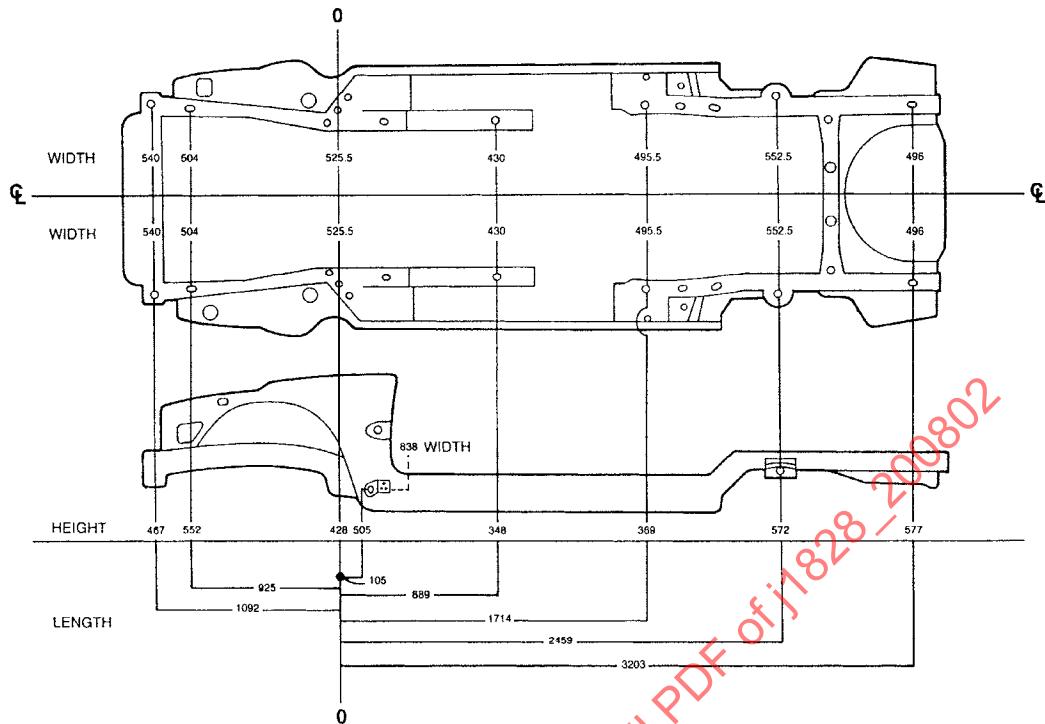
PLAN AND SIDE VIEWS—UNDERBODY
